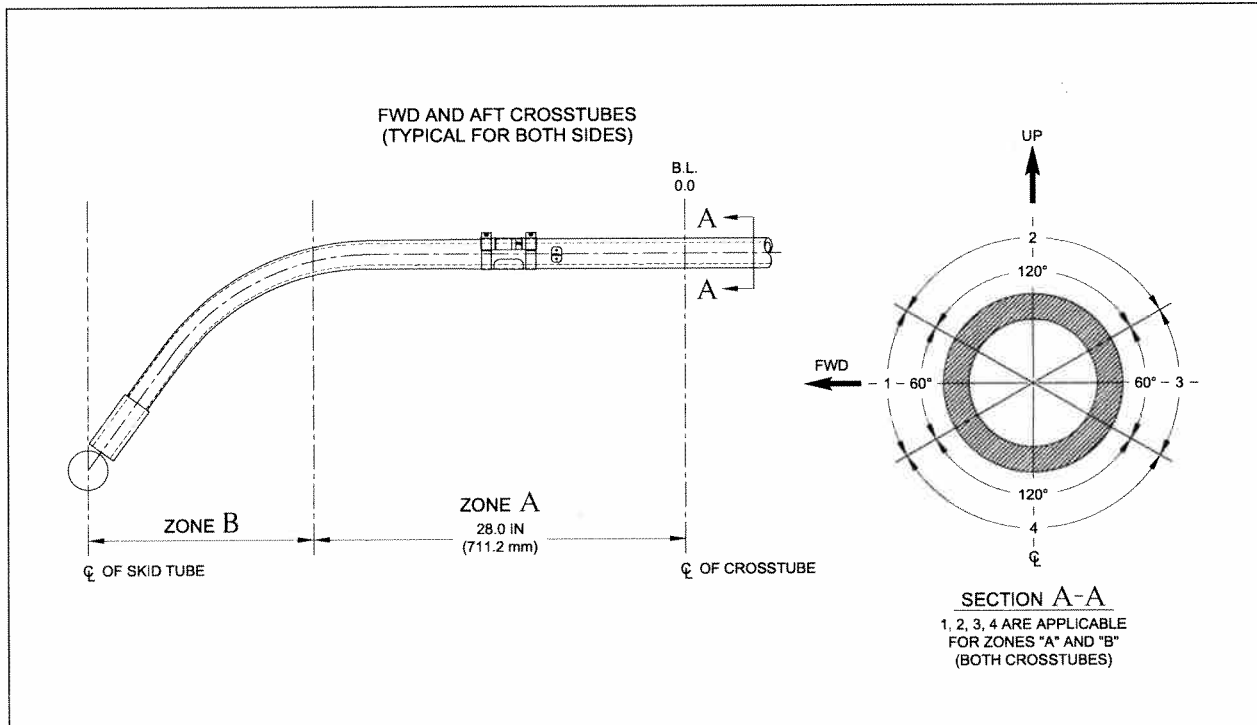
LOW SKID GEAR CROSSTUBE DAMAGE LIMITS
